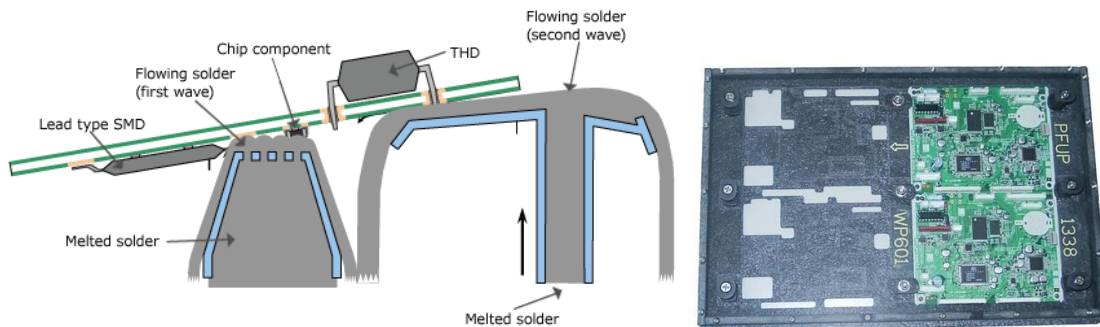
wave soldering process, selective wave soldering frame (jig)
